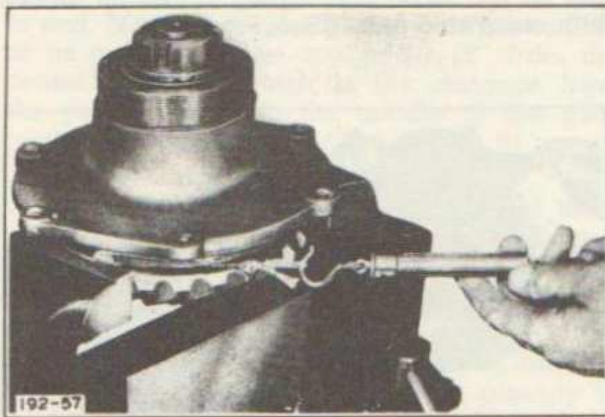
Testing 2nd Reduction Bevel Gear Bearing Adjustment
